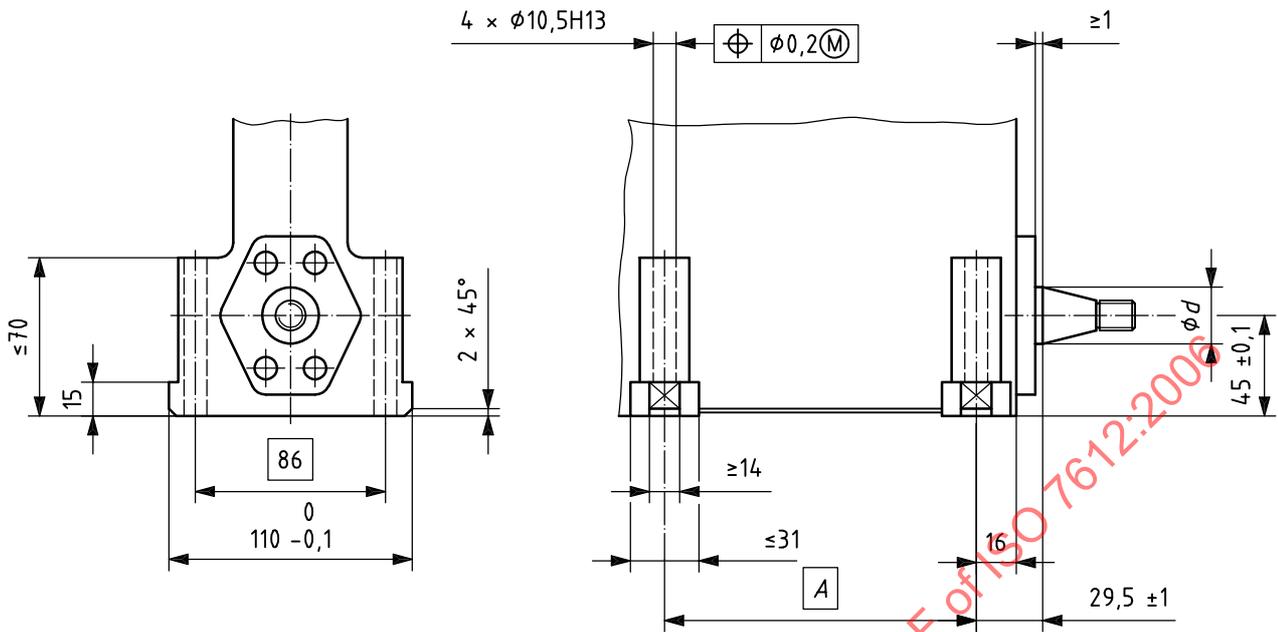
Base-mounted in-line fuel injection pump — Type 1
